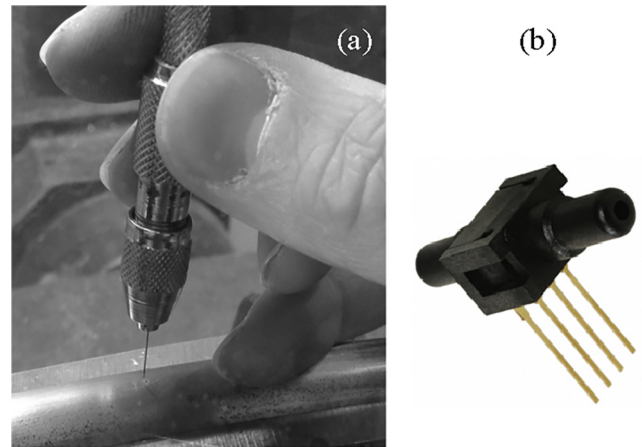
a) Detail of the 0.3 mm pressure tap drilled on an instrumented rod for static pressure measurements. b) Picture of the micromachined deformable pressure drop sensors used in this work.
